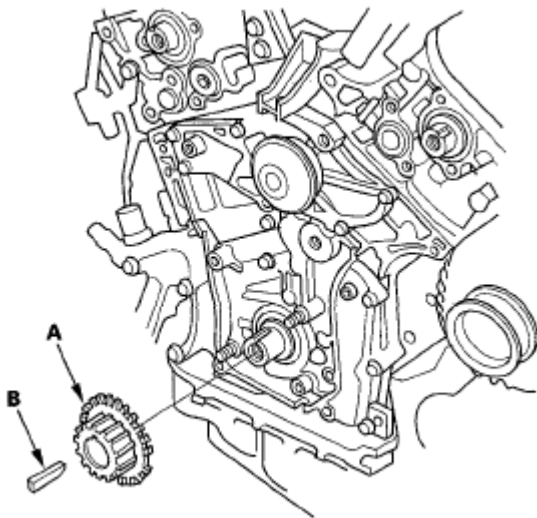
Identifying Timing Belt Drive Pulley And Key
